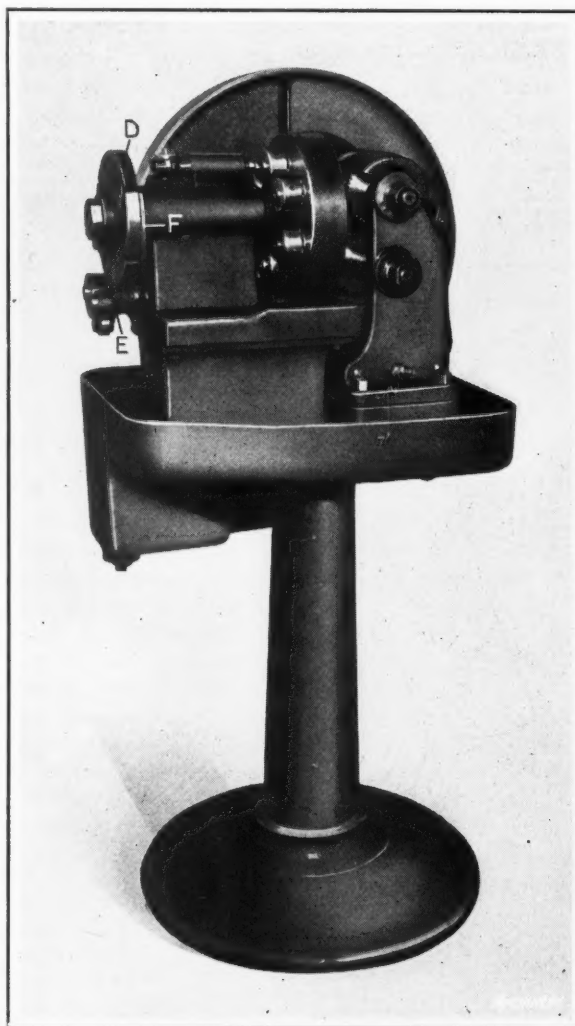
Nut Castellating and "Hexing" Machine brought out by the Manufacturers' Consulting Engineers
